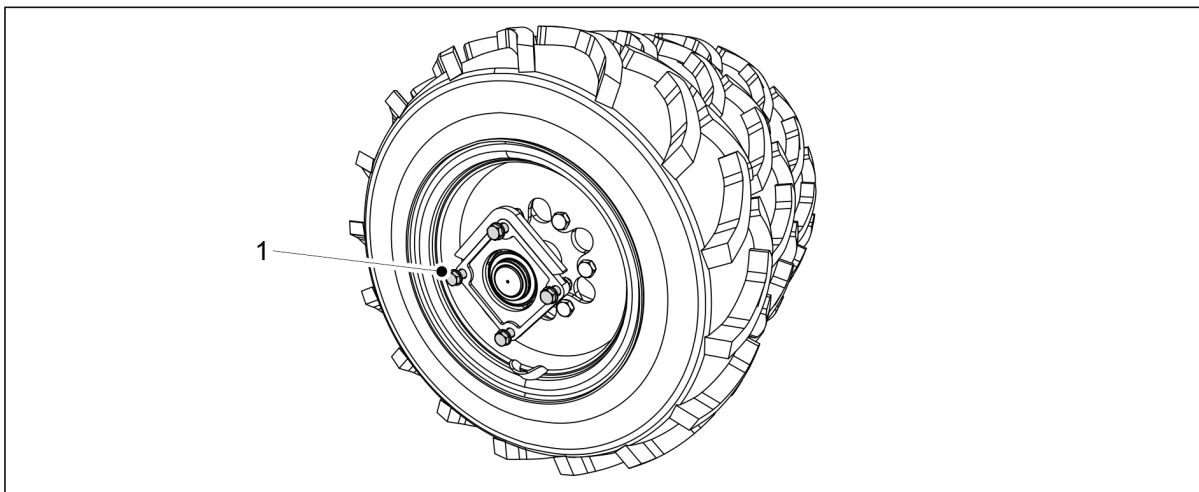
275. The wheel assembly is supported by bolts
